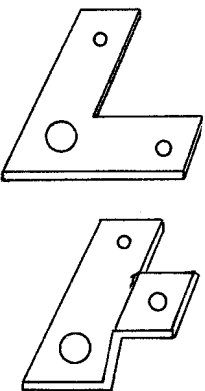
Photo showing how Bob's bracket looks after installation with holes drilled in the parts.
